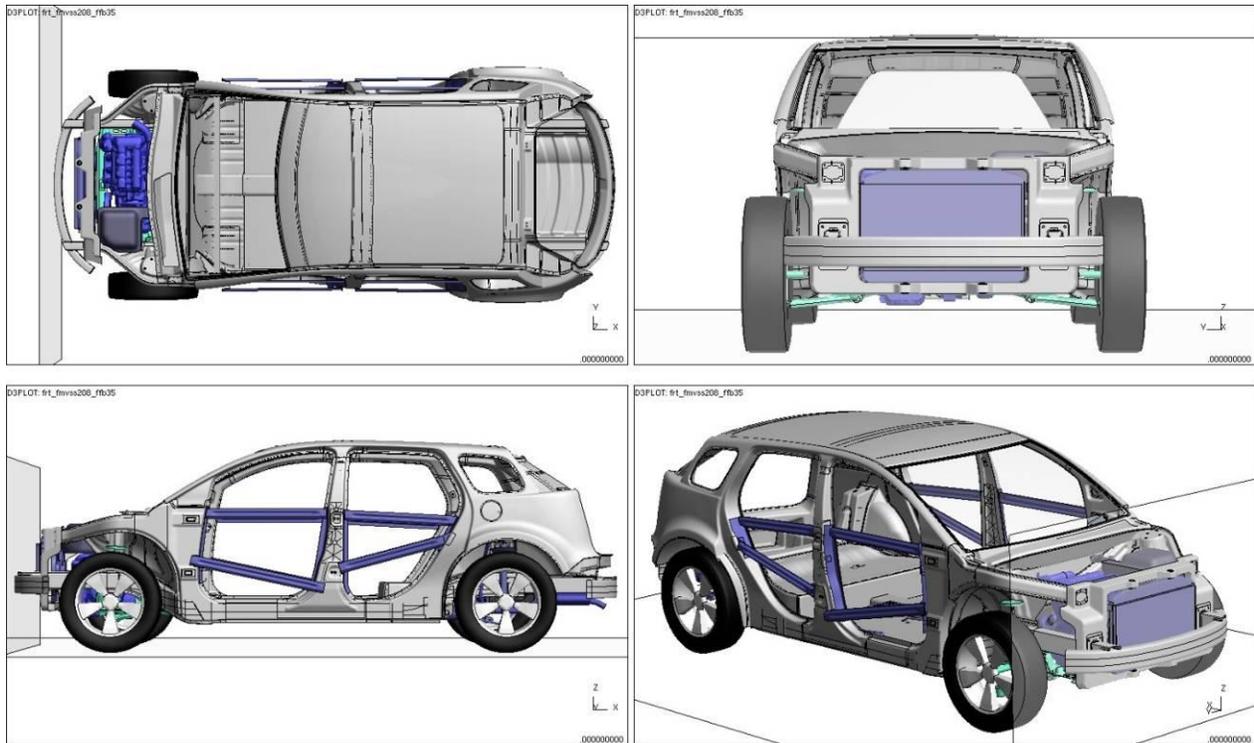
a: Rigid, deformable wall crash-test model setup
